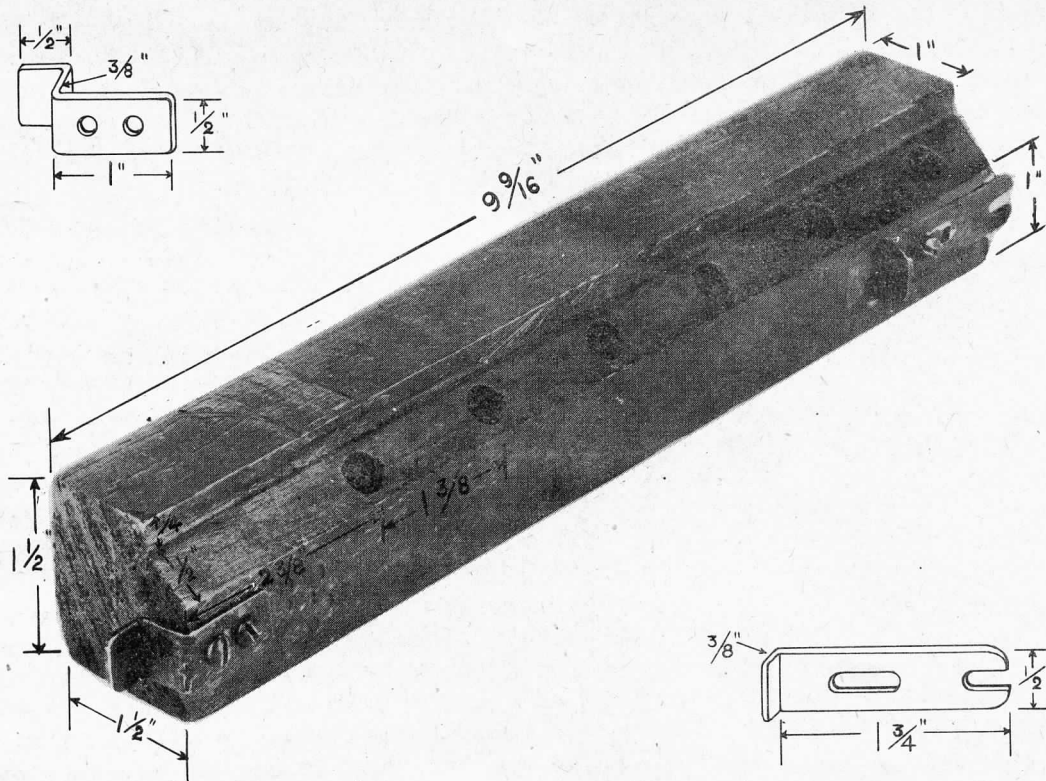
DETAILS OF THE COMPLETED PLUG HOLDER
